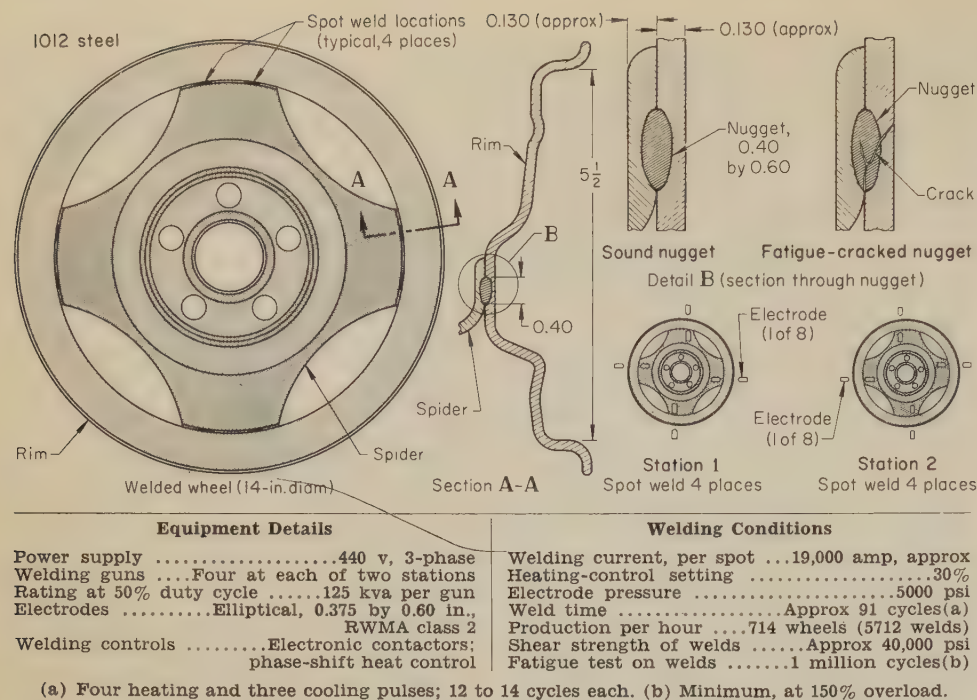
Automotive wheel of which spider and rim were joined with eight spot welds in two four-gun stations of a production line. Service failures by fatigue cracking, as shown at upper right, were rare. (Example 373)
